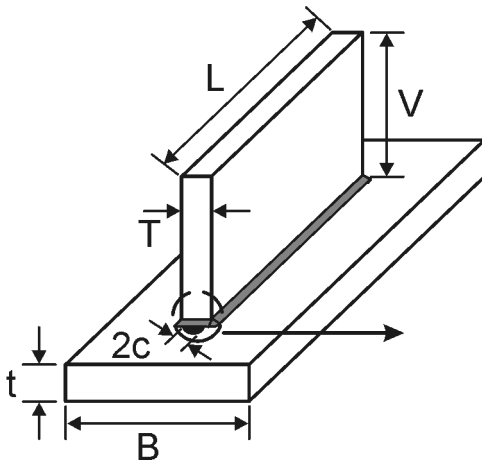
Fracture mechanical model chosen for determining the allowable plate thickness
